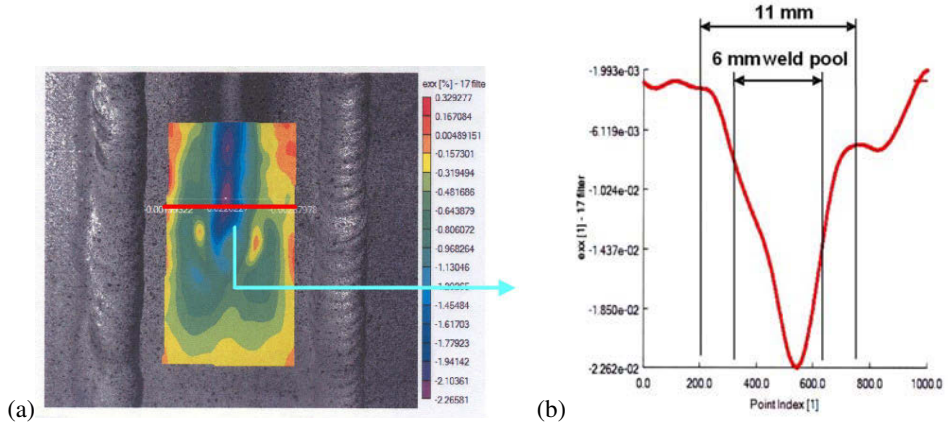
(a) Light optical DIC measurements made on bottom side of plate during autogenous, full-penetration, bead-on-plate GTA welding of aluminum 6060 plate. Note black paint speckle pattern sprayed onto plate prior to welding. (b) Strain across mushy zone of weld pool showing a constant outward displacement with distance from weld centerline.
